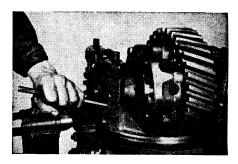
Center punch one differential carrier leg and bearing cap to identify for proper reassembling
